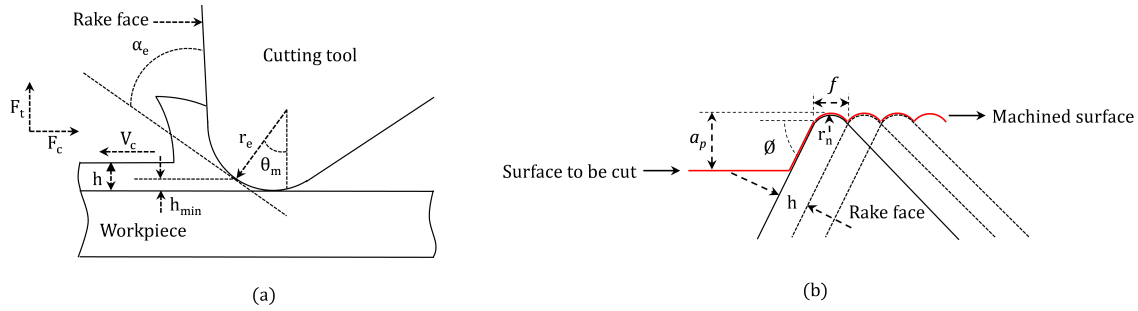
(a) Machining considering cutting edge radius and uncut chip thickness; (b) The cutting layers to form the machined surface
